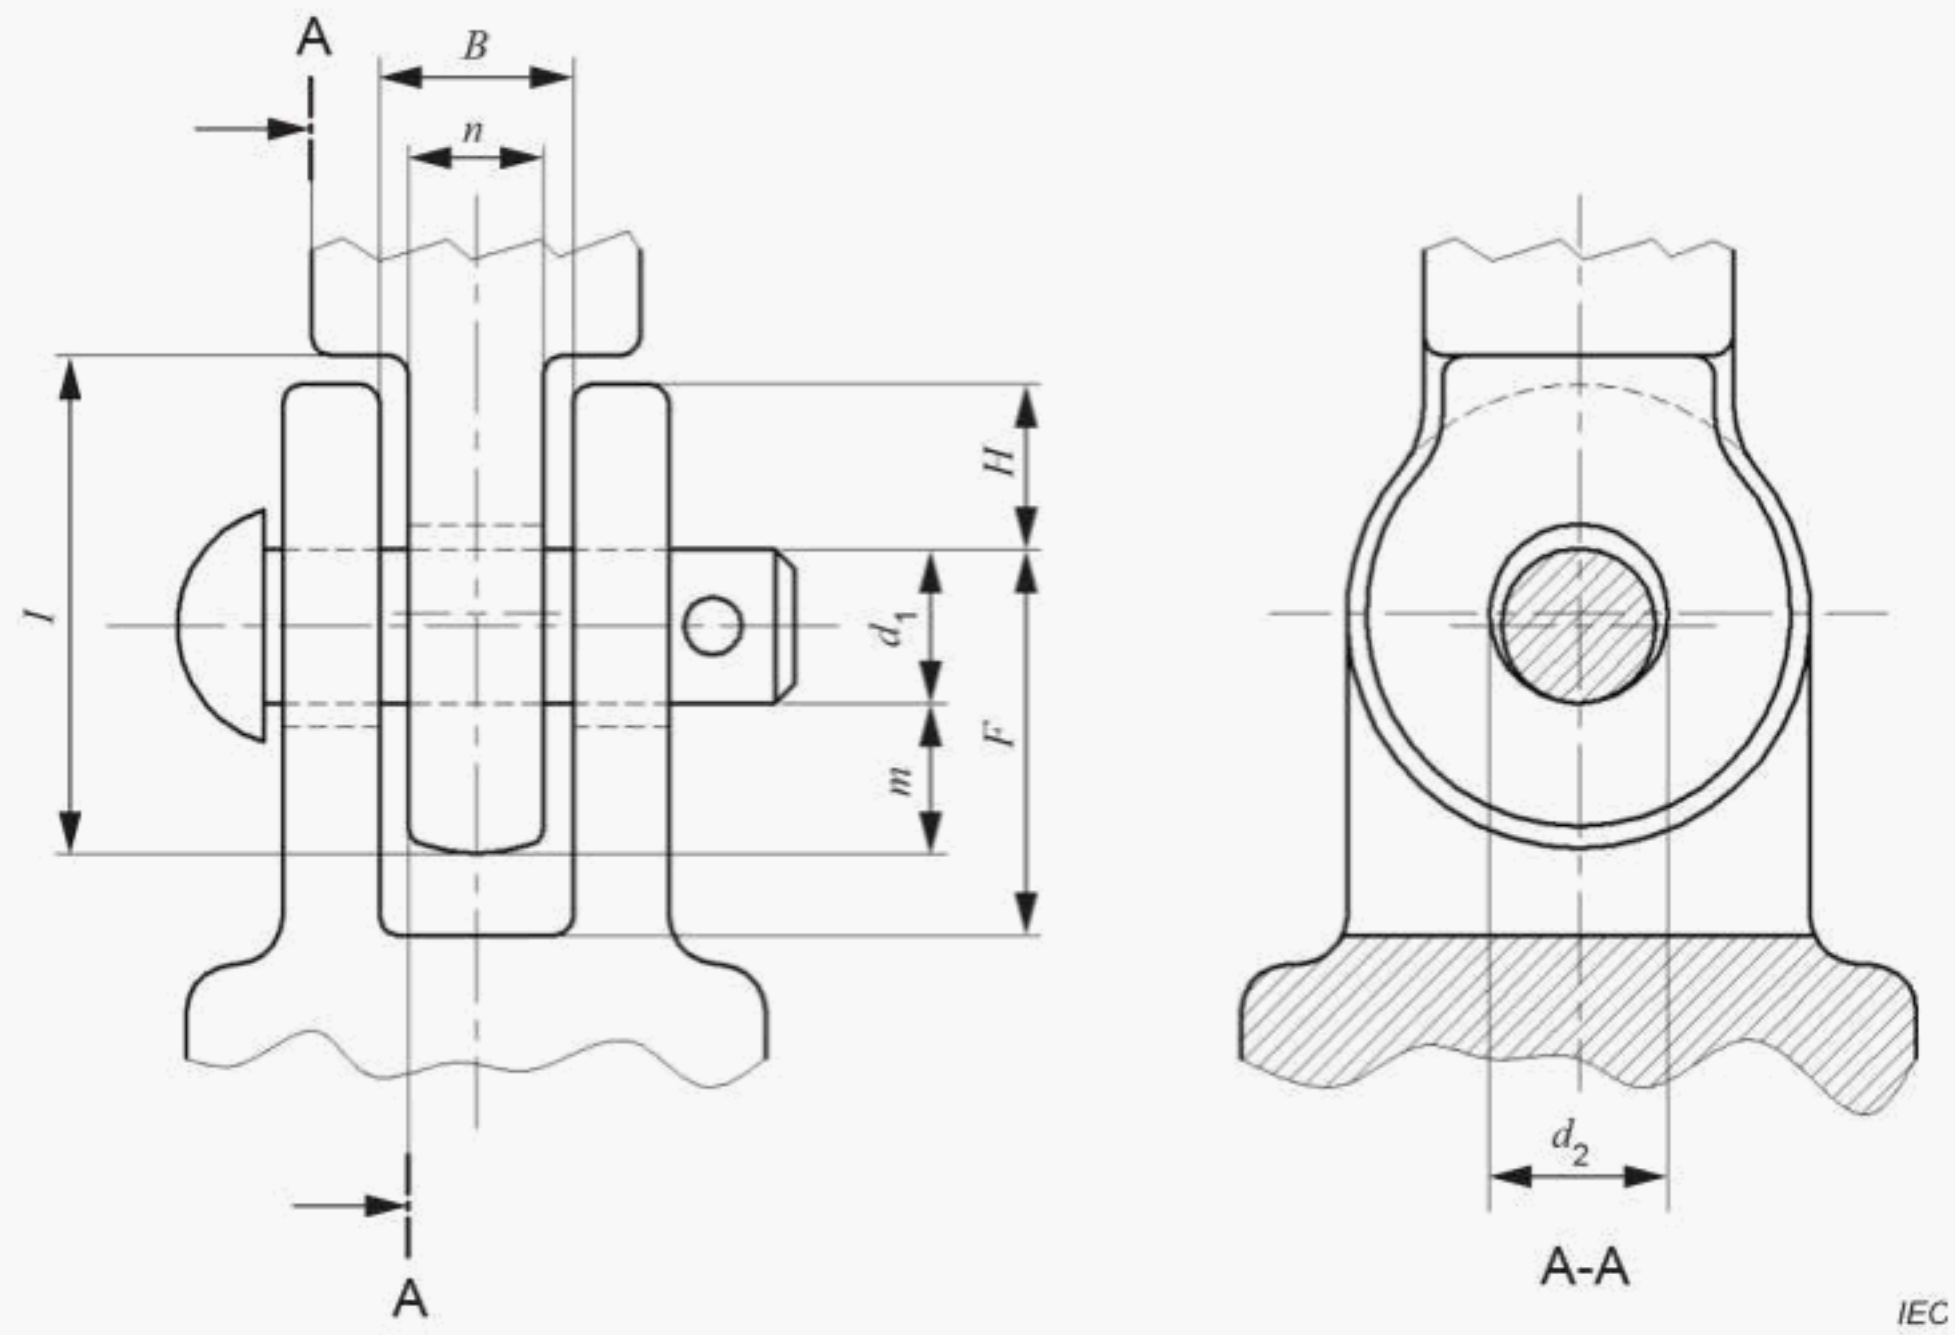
Dimensions of clevis and tongue couplings for long rod insulators
